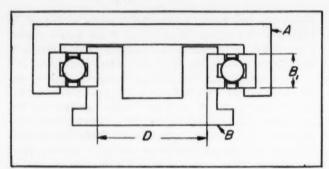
Assembled slide unit. Dimension "D" is made oversize in order to provide the desired preloading
